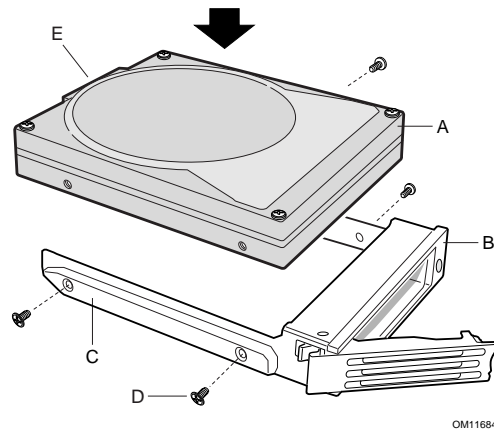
Intel® Storage System SSR316MJ2 Hard Drive Carrier Assembly
